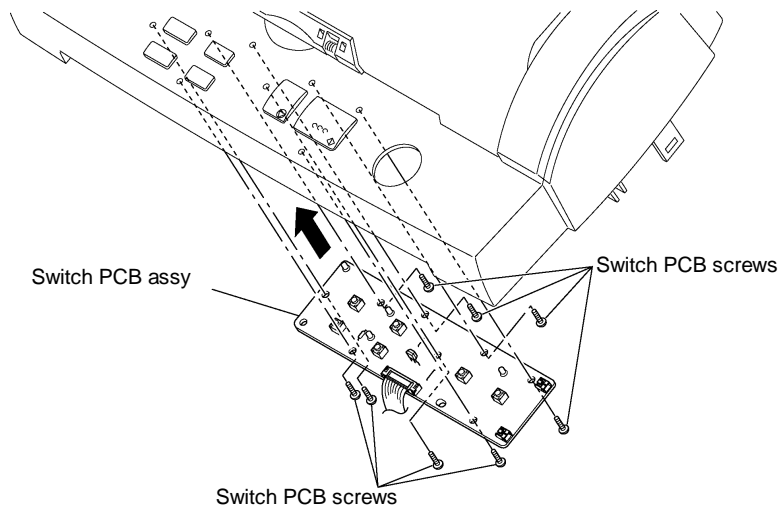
Installing the Dial Switch Holder Assy 3
